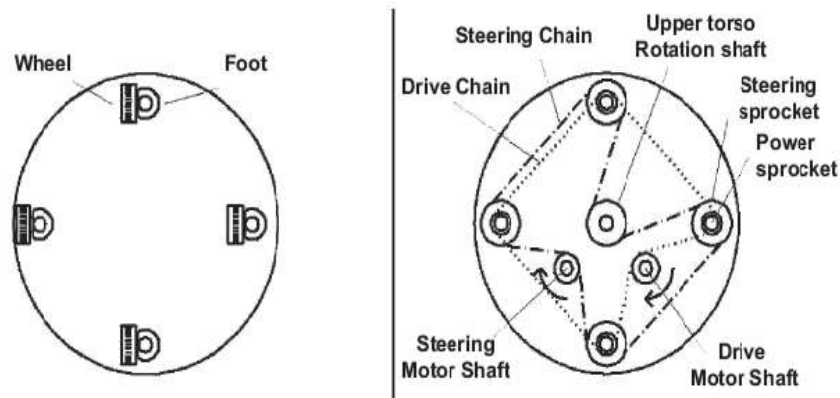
A four-wheel synchro-drive configuration: Bottom view and Top view
